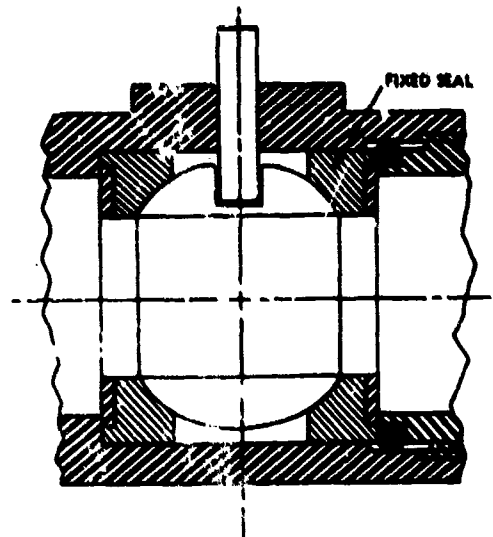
Reduced-Port Ball Valve with Floating Ball
